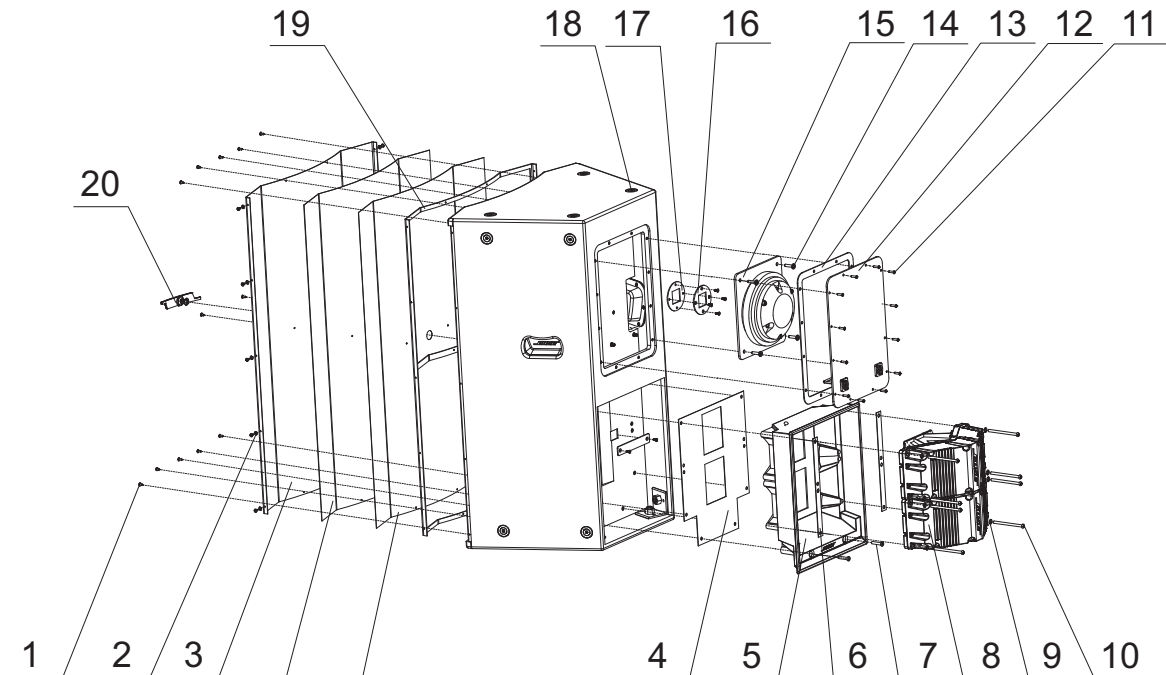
Panaray LT 9402 WR Loudspeaker Exploded View
